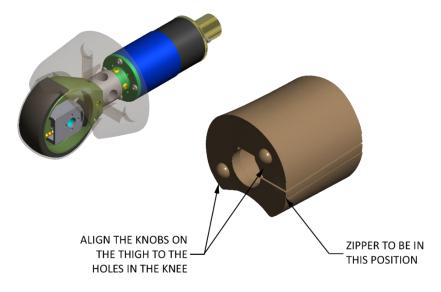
Knee Assembly to Femur Bushing Assembly Installation.
